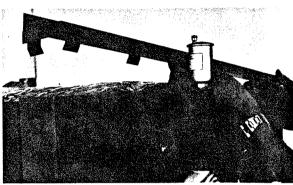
& 36 Installation of right and left hand cover of side panel on one small side as shown above.
